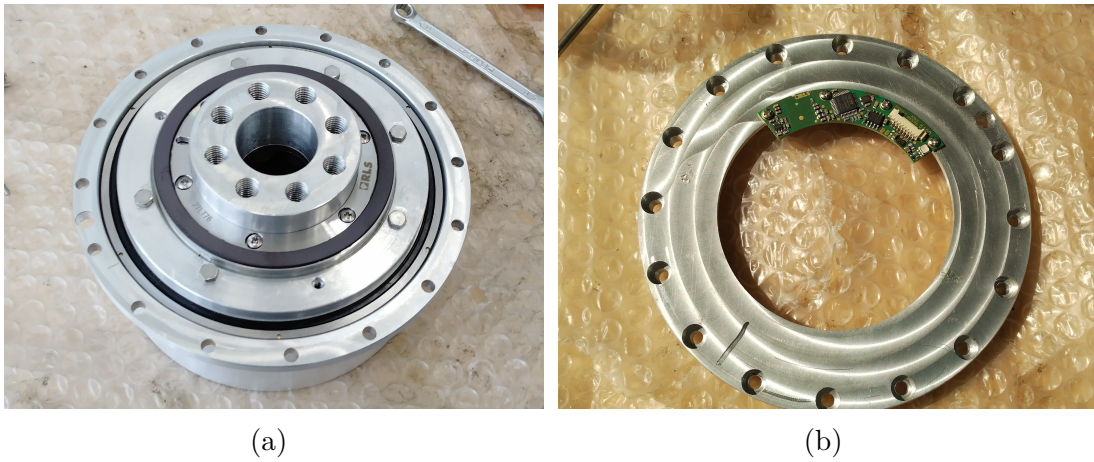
(a) Absolute encoder magnetic ring, installed on motor output shaft. (b) Absolute encoder PCB read sensor, installed on drive sub-casing 4.
